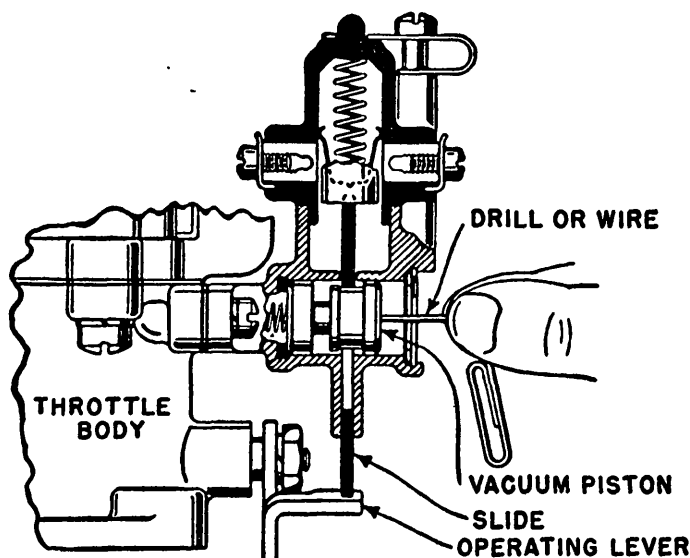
B Inserting drill or wire through screen to operate vacuum piston on Stromberg starter switch
